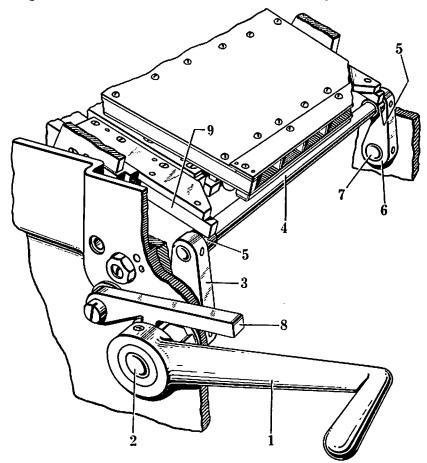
Magazine Frame Lifting Mechanism for Double Distributor Machines. Only the lower magazine frame is shown: the upper three magazine frames have been omitted in order to show the lifting device more clearly. When the magazine frame is fully forward, lever *I* may be drawn forward to clevate the assembled frame. This will permit full access to the two lower magazines for removal.
